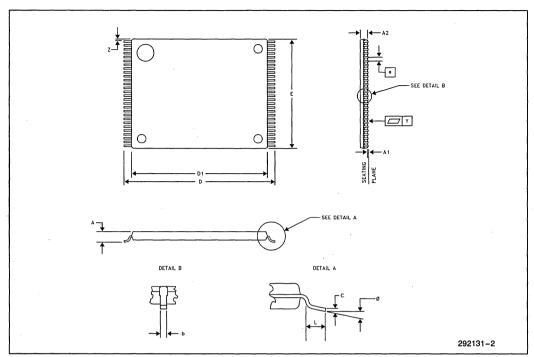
28F016XD 56-Lead TSOP Type I Package Dimensions
